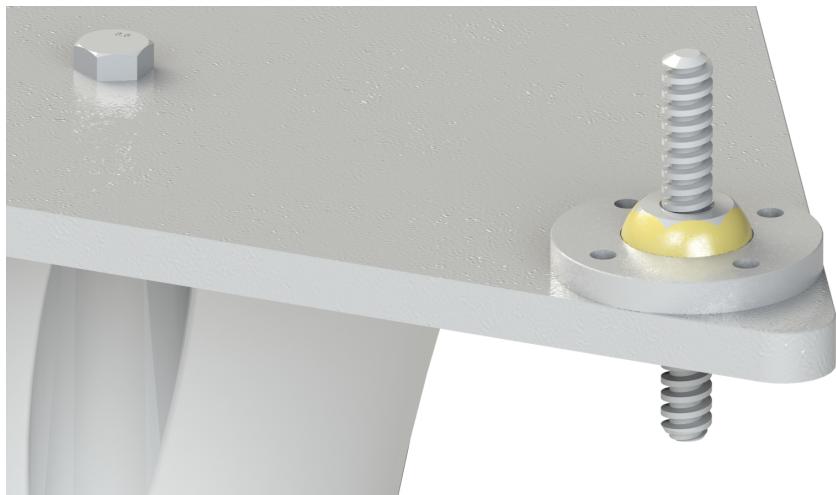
Rendering of the ball, nut, and flange assembly on the platform. Note that the lead screw shown is a placeholder model and not representative of the actual length of the lead screws that will be used
